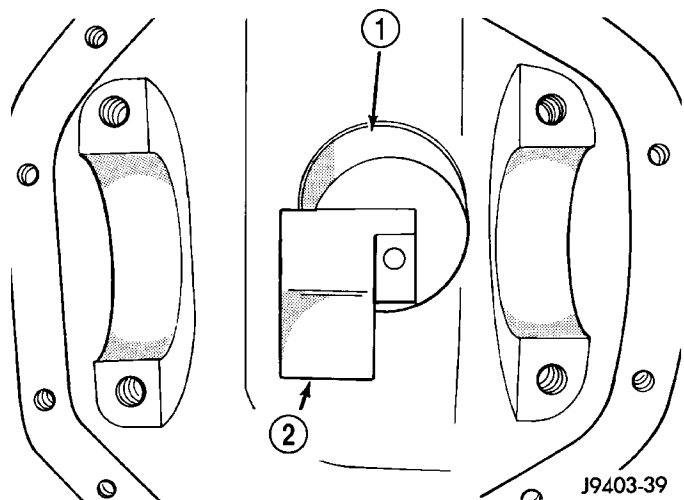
PINION GEAR DEPTH GAUGE TOOLS
